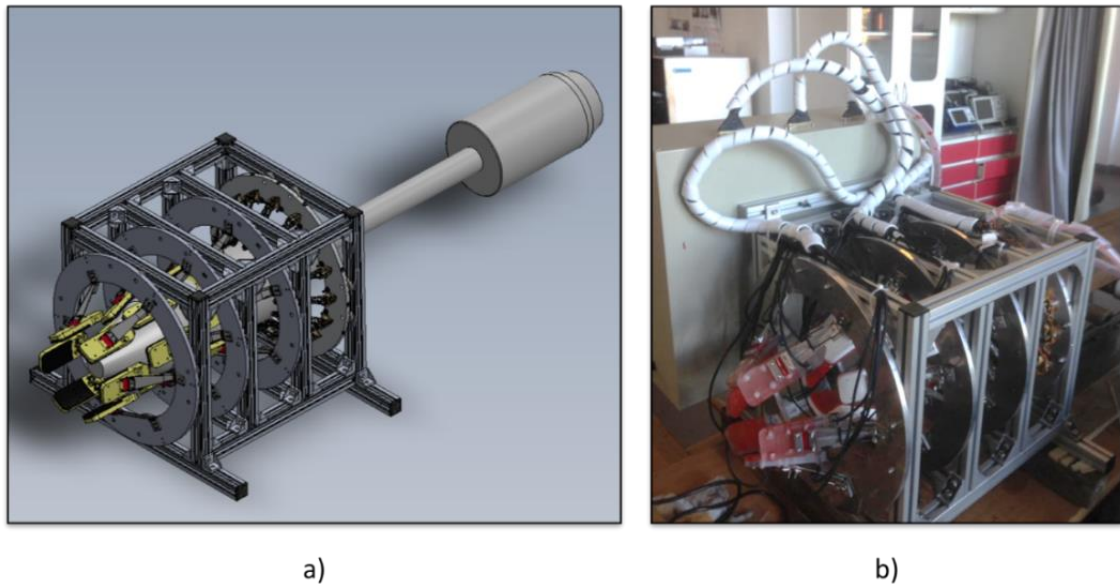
29: Design of the prototype inspection system in a) and b) the built prototype.
